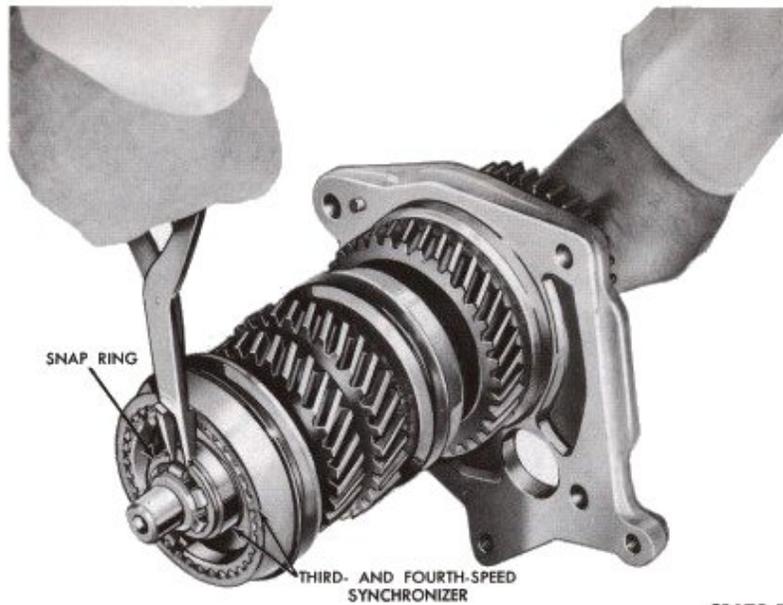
Third and Fourth-Speed Synchronizer Removal
